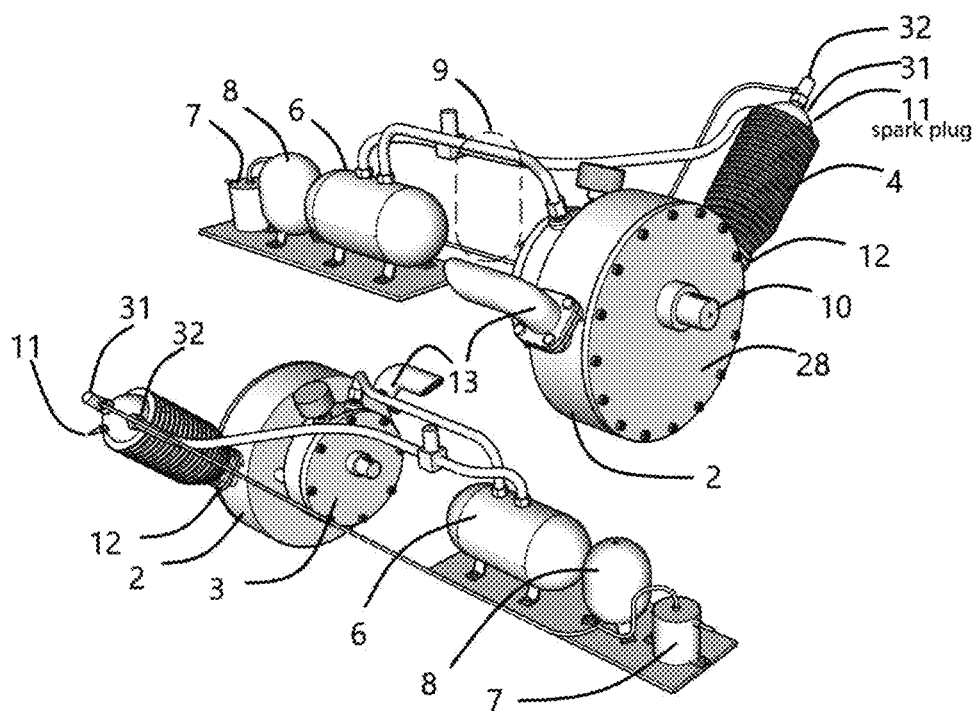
Vane rotary type motor block with remote auxiliary equipment, front and back views.
